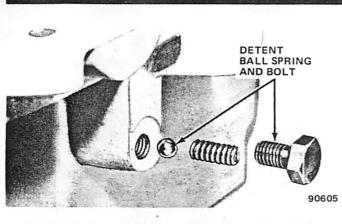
D-10 Detent Ball, Spring and Bolt Removal/Installation
